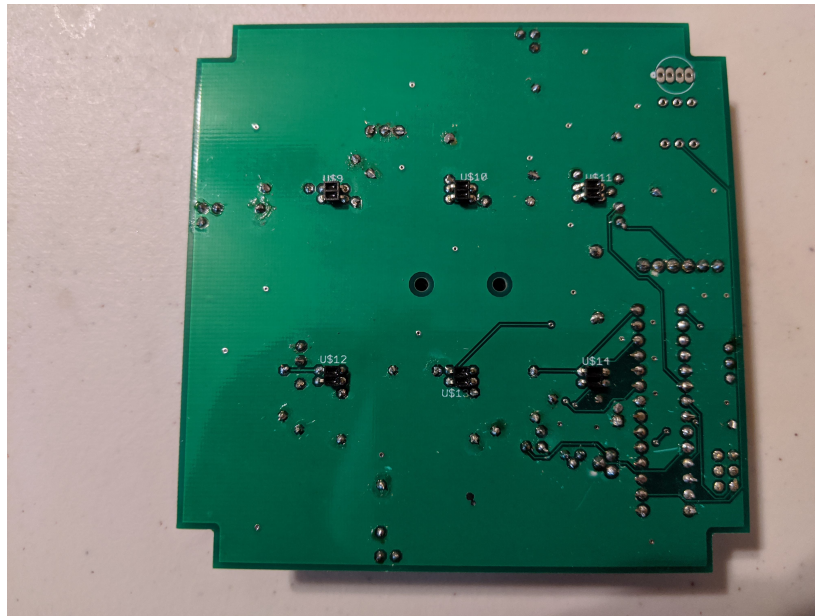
Top side of soldered PCB. This shows the 6 reflective sensors which read the pad encoding.
